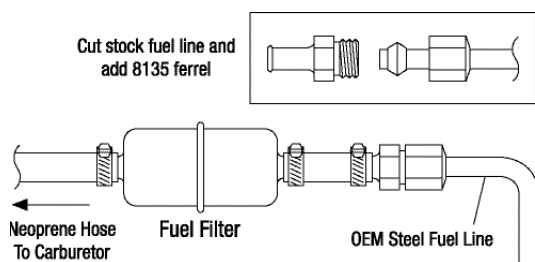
Fuel Line Kit #8135 Installed on Stock Steel Line
